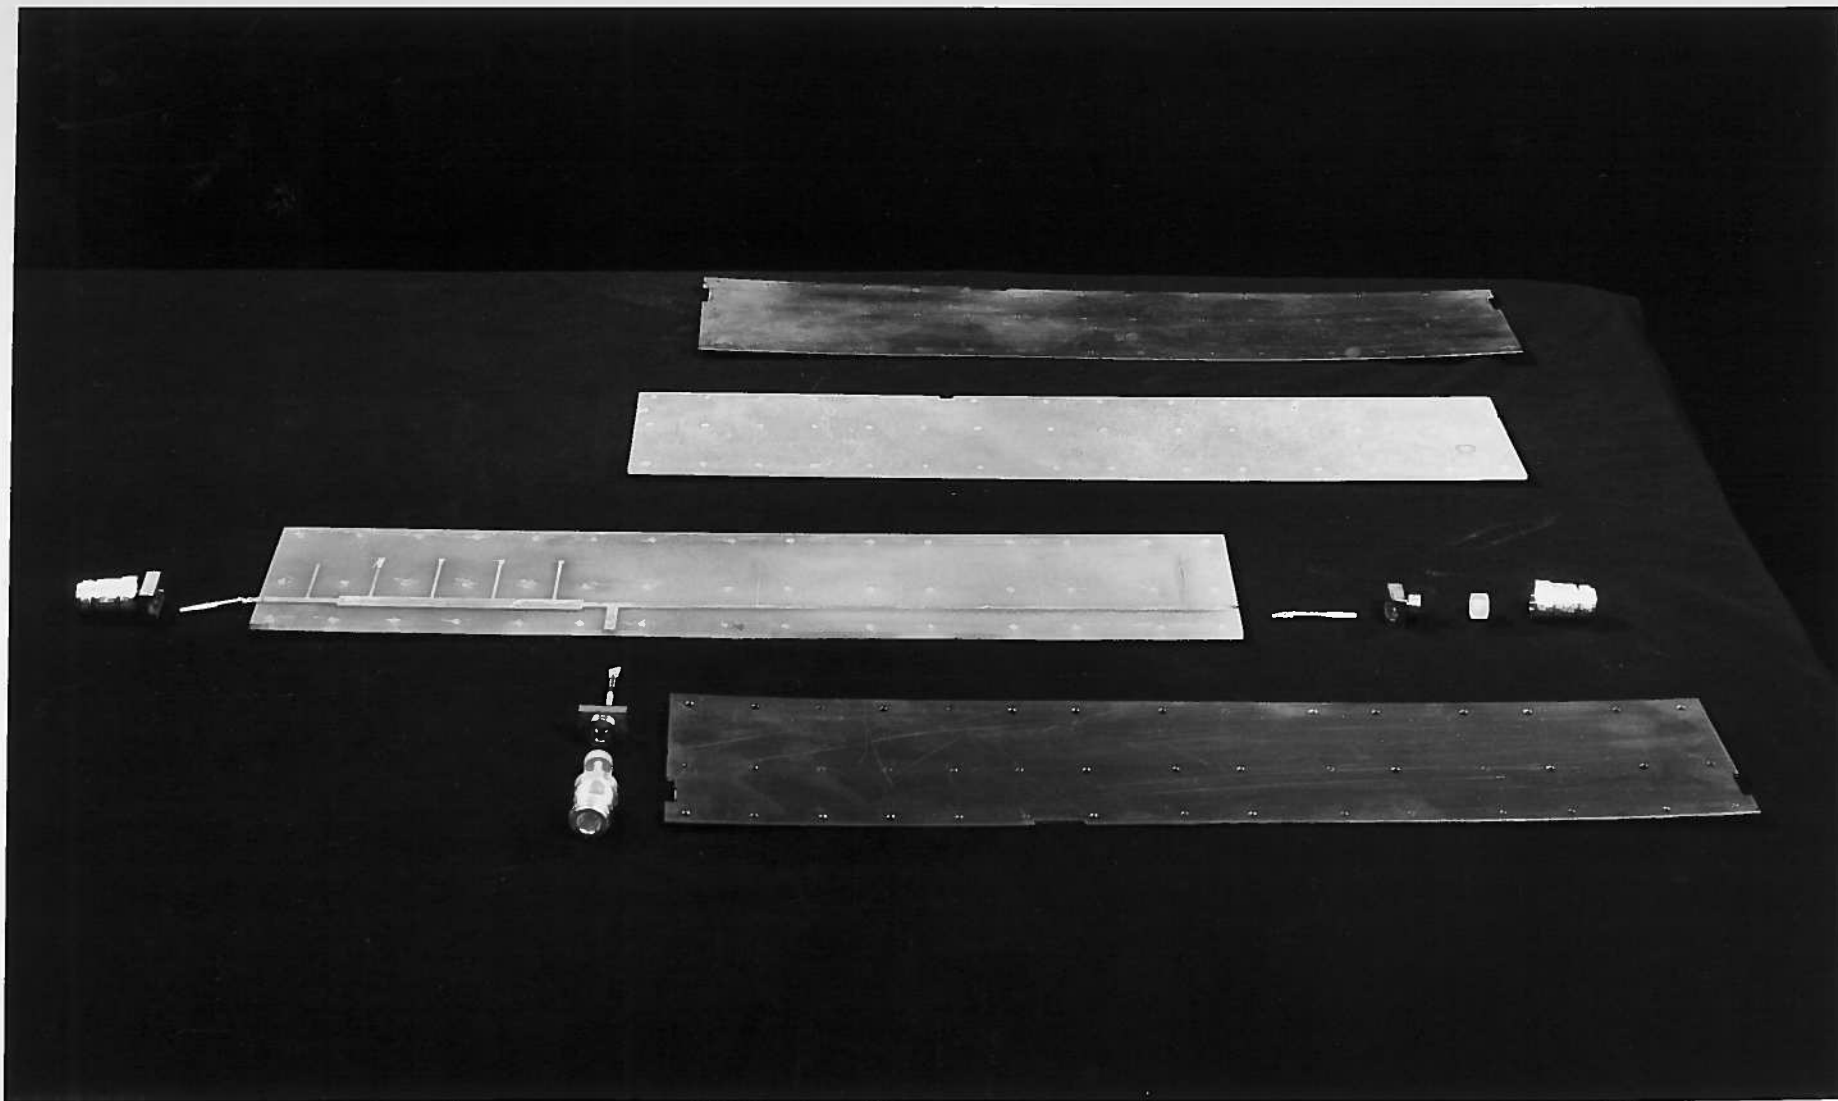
PLATE I DIPLEXING FILTER BEFORE ASSEMBLY
